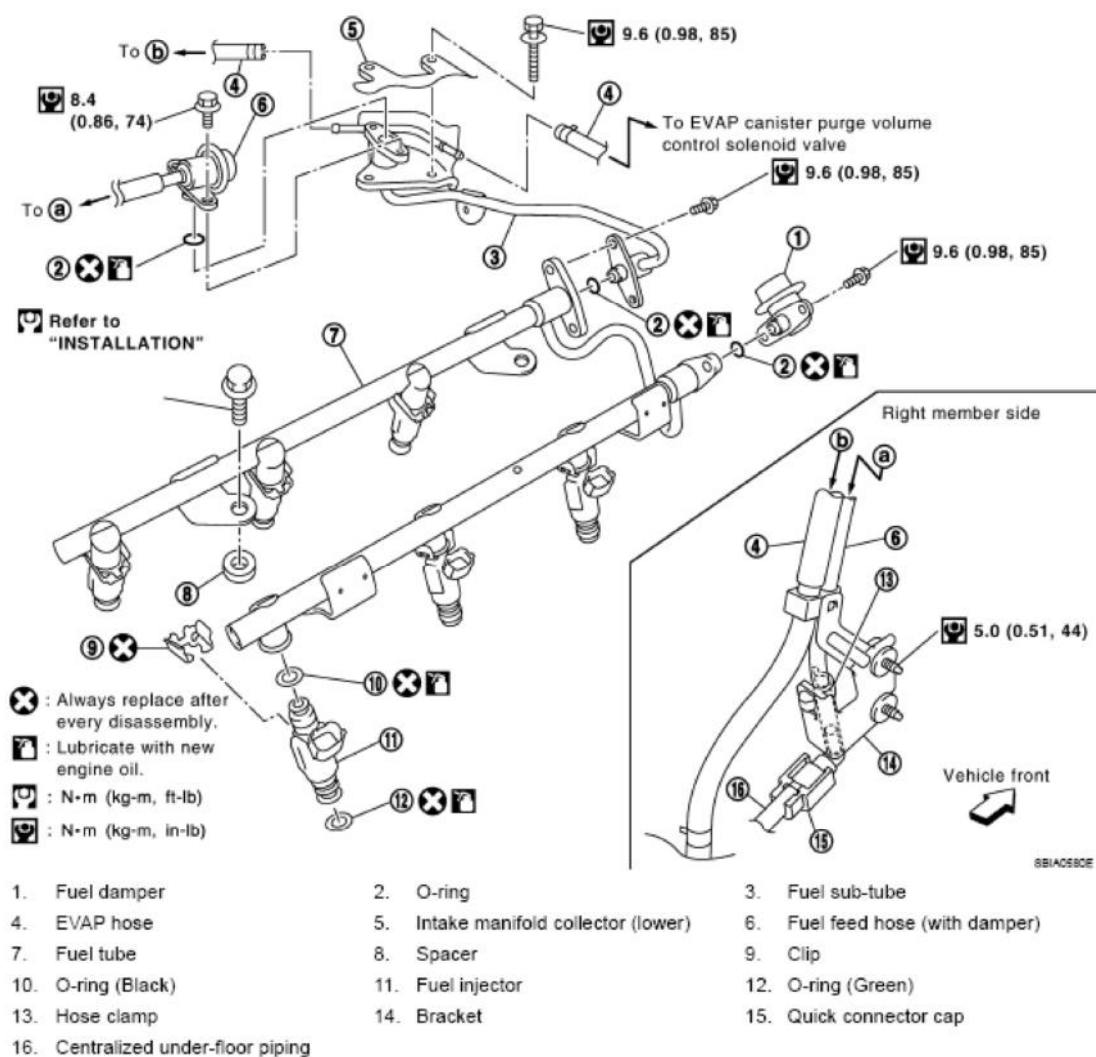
Identifying Fuel Injector And Fuel Tube Components With Torque Specifications
